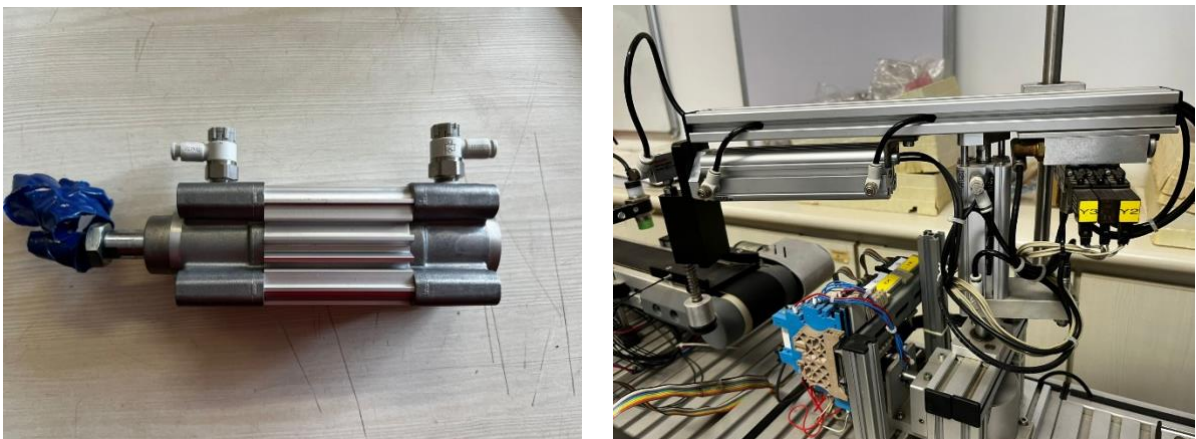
Pneumatic Cylinders used in the Mechatronics Assembly
